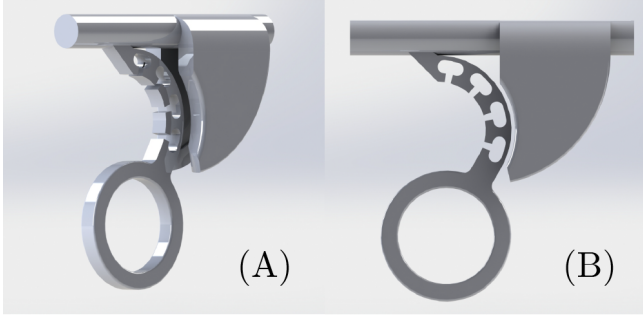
3D drawing of the improved conceptual grasper principle. Friction does not interfere with the bending flexure joint-segment. A) 3D view of the SolidWorks drawing. B) Side view of the SolidWorks drawing.
